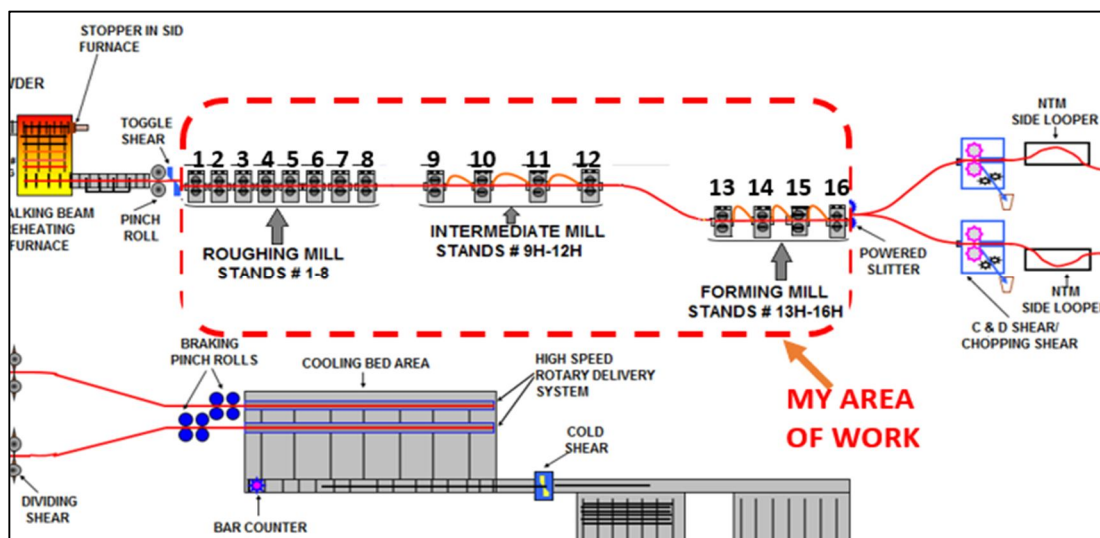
OVERVIEW OF MILL STAND GEARBOXES
